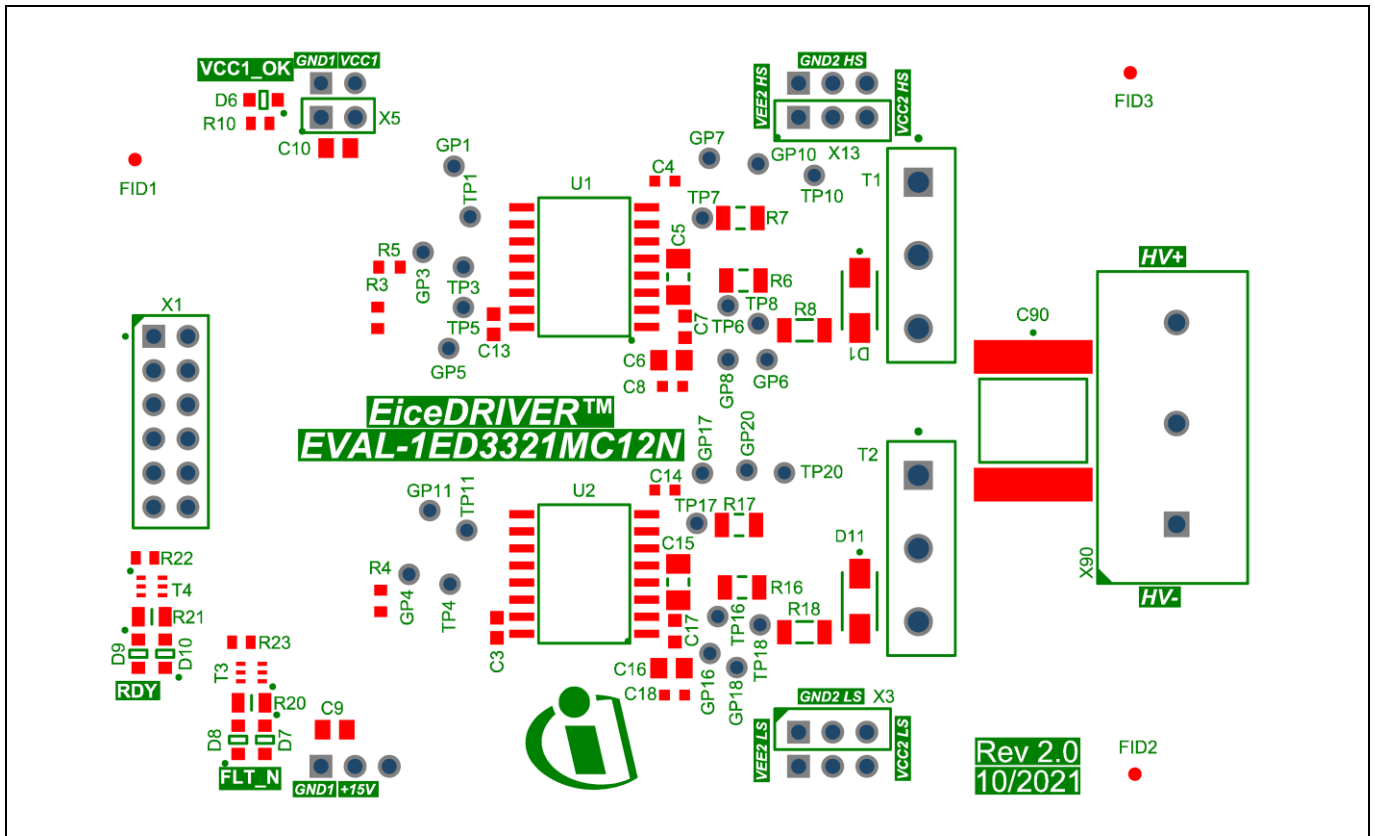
Eval-1ED3321MC12N – Assembly drawing top side
